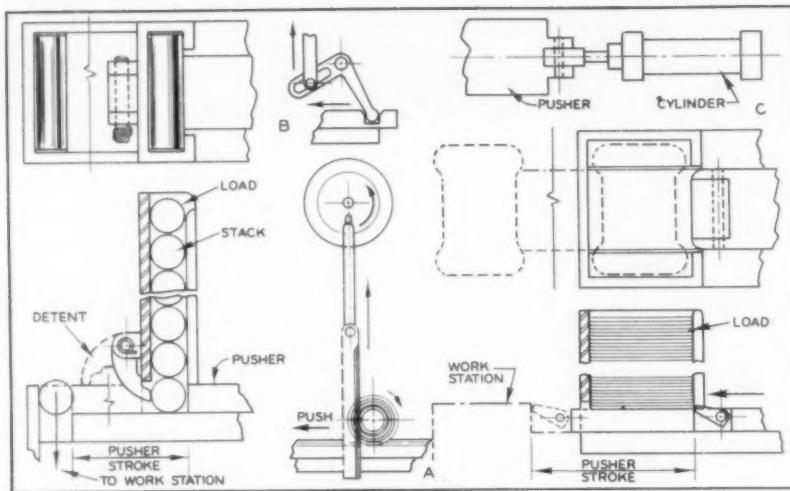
, at left, a magazine feeder for short bars. The part at bottom of the stack is retained by the recessed pusher and spring-return detent. At right, a magazine feeder for flat blanks. An "umbrella catch" pawl in the pusher engages the blank on the work stroke, recedes on return stroke. The pushers may be actuated by rack and pinion, as shown at A; by linkage, as at B; or by air or hydraulic cylinder, as shown at C.
